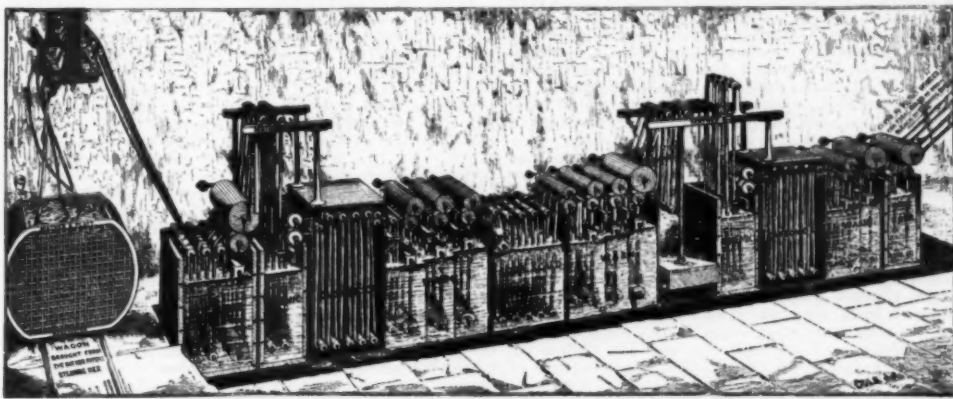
THE MATHER-THOMPSON CONTINUOUS CHEMICKING MACHINE.
